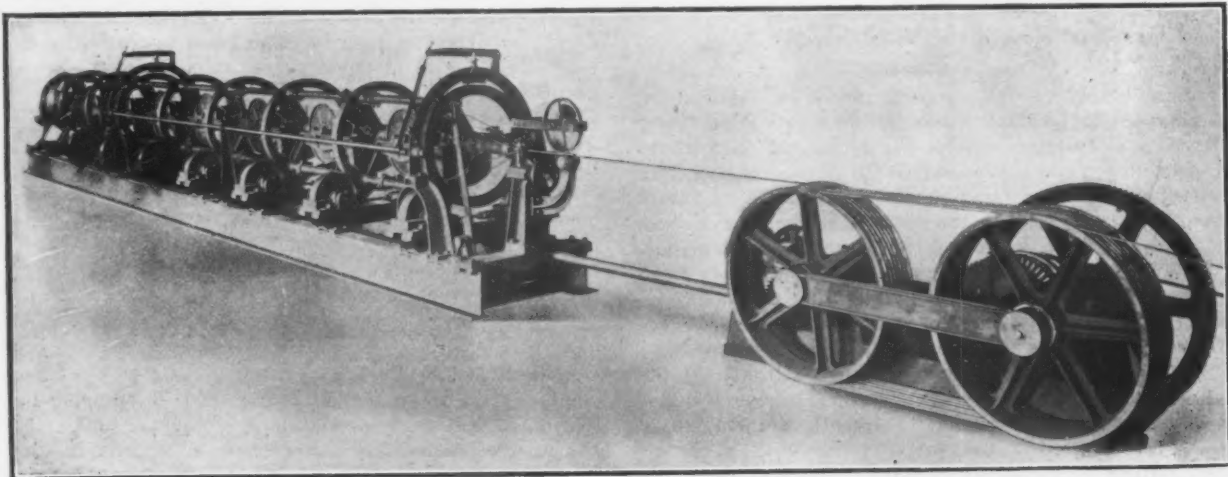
An English Type Wire Stranding Machine and Take-Up Built by the New England Butt Company, Providence, R. I.
